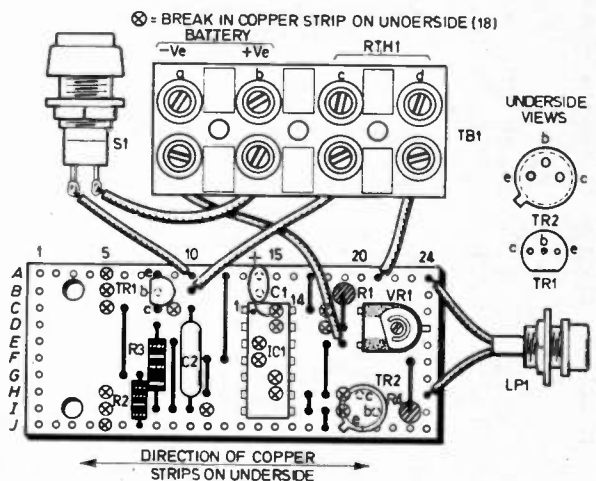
Circuit board layout and component inter-wiring. Note that the thermistor RTH1 is not shown in this diagram but is connected to the terminal block via a long cable and located at some remote location.
